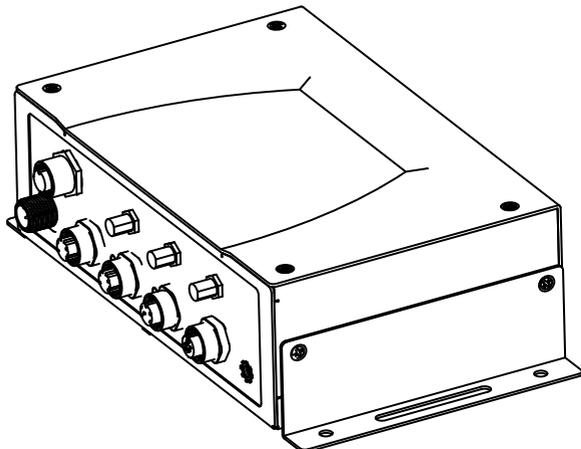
Device with 2 pre-mounted holding brackets on the bottom sides of the device
